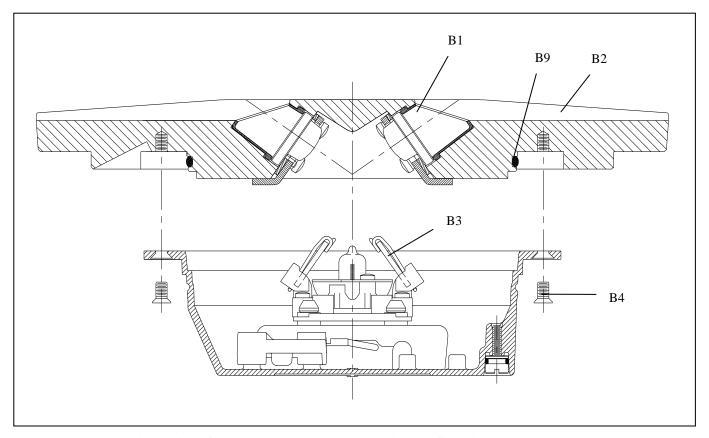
Cross-Sectional View of F-Range Inset Light Fixture (Typical Configuration)
